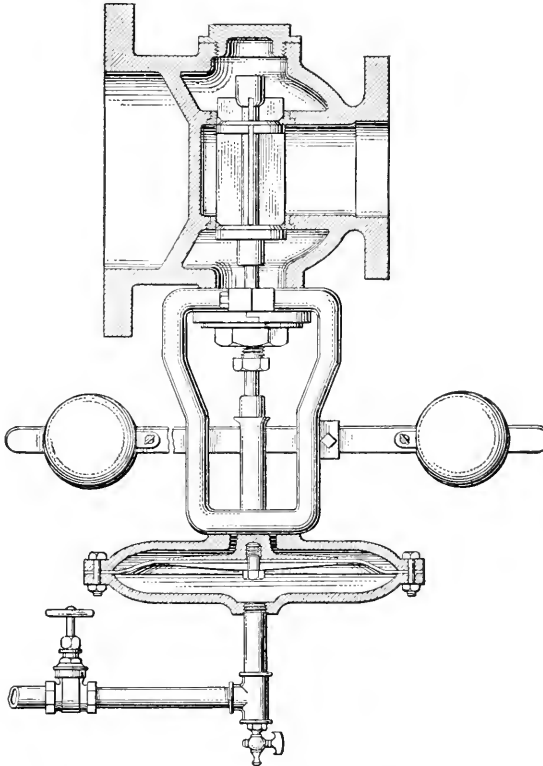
PRESSURE REDUCING VALVE MONASH CLASS C-1.
